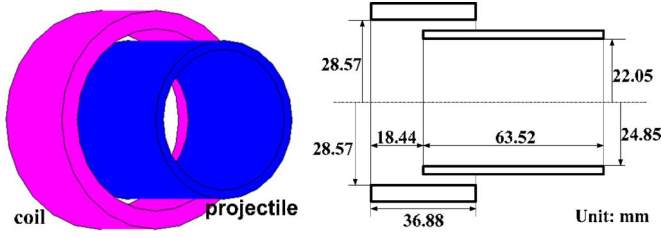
Schematic drawing of single-stage coil gun and dimensions.
